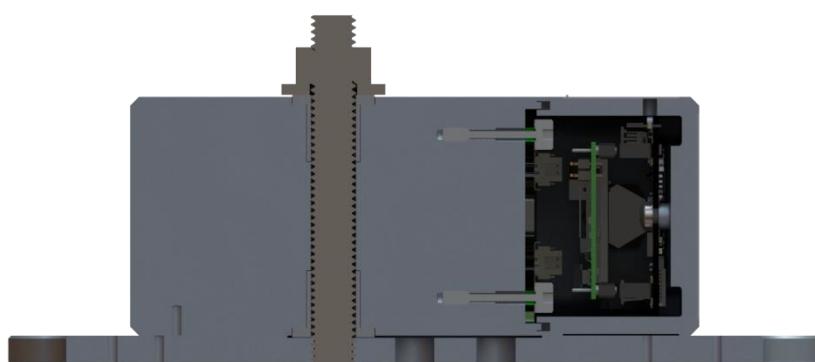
Device Fixed with Threaded Rod to Mounting Plate
